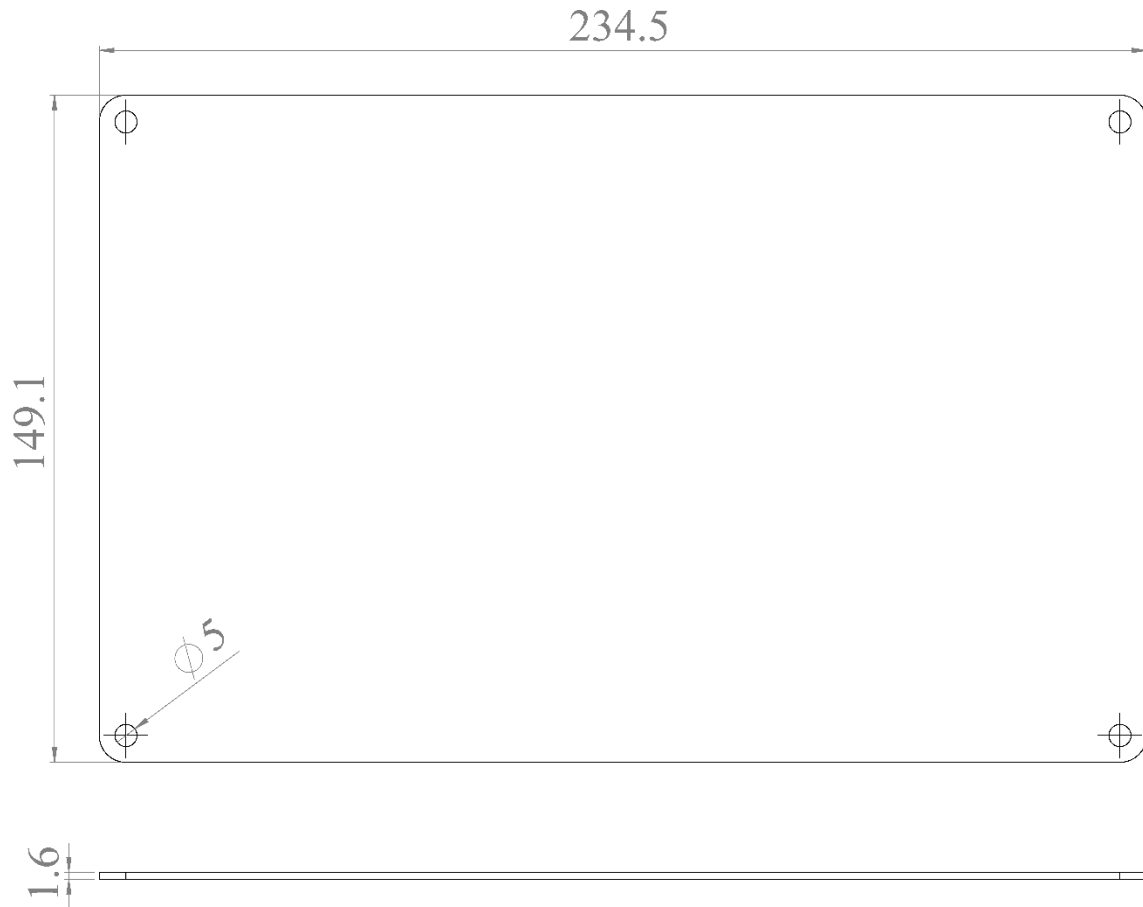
Dimensioned drawing of the nylon cover, all dimensions are in mm
